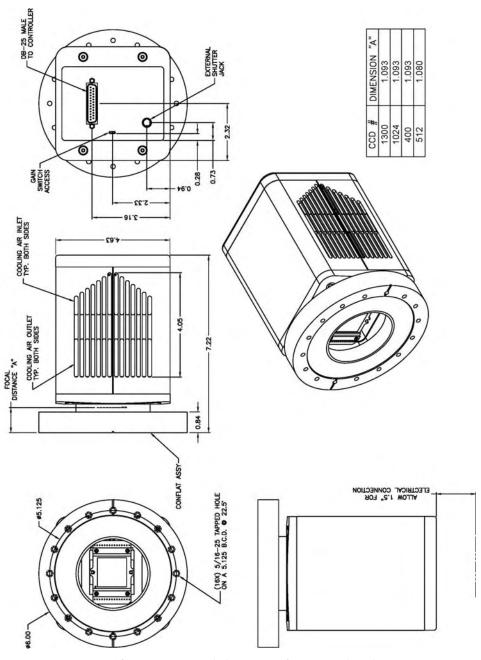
PI-SX TE-Cooled Camera (6.00" ConFlat Flange)
